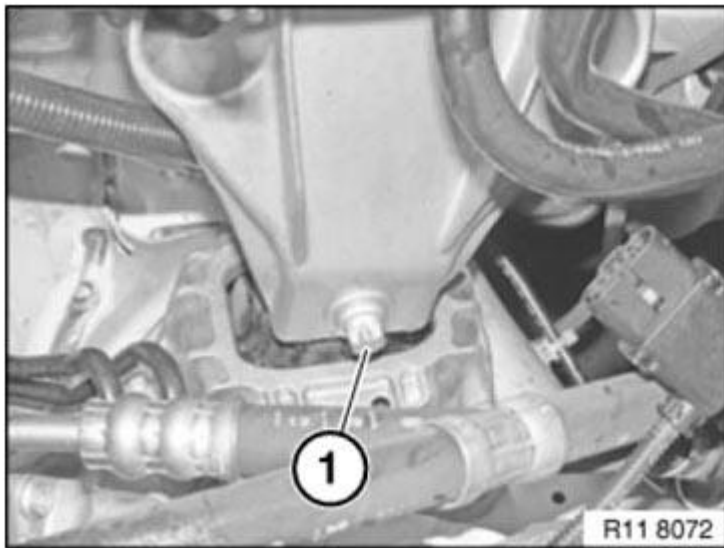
Identifying Screws On Engine Mount On Left And Right
